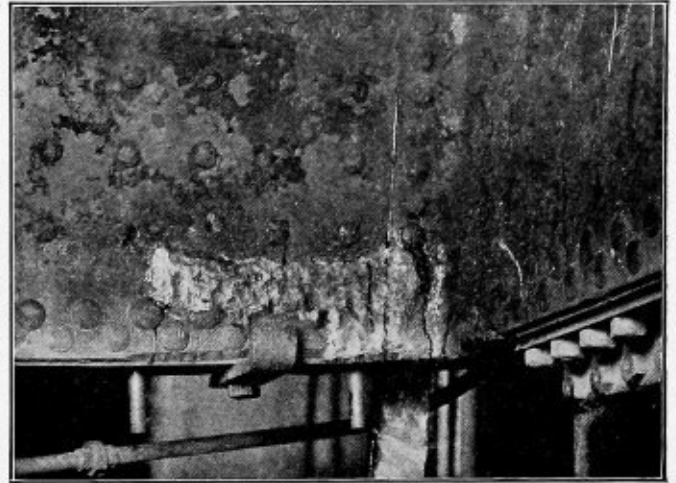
REPAIRS TO FIRE-BOX SHEETS MADE BY ELECTRIC WELDING
